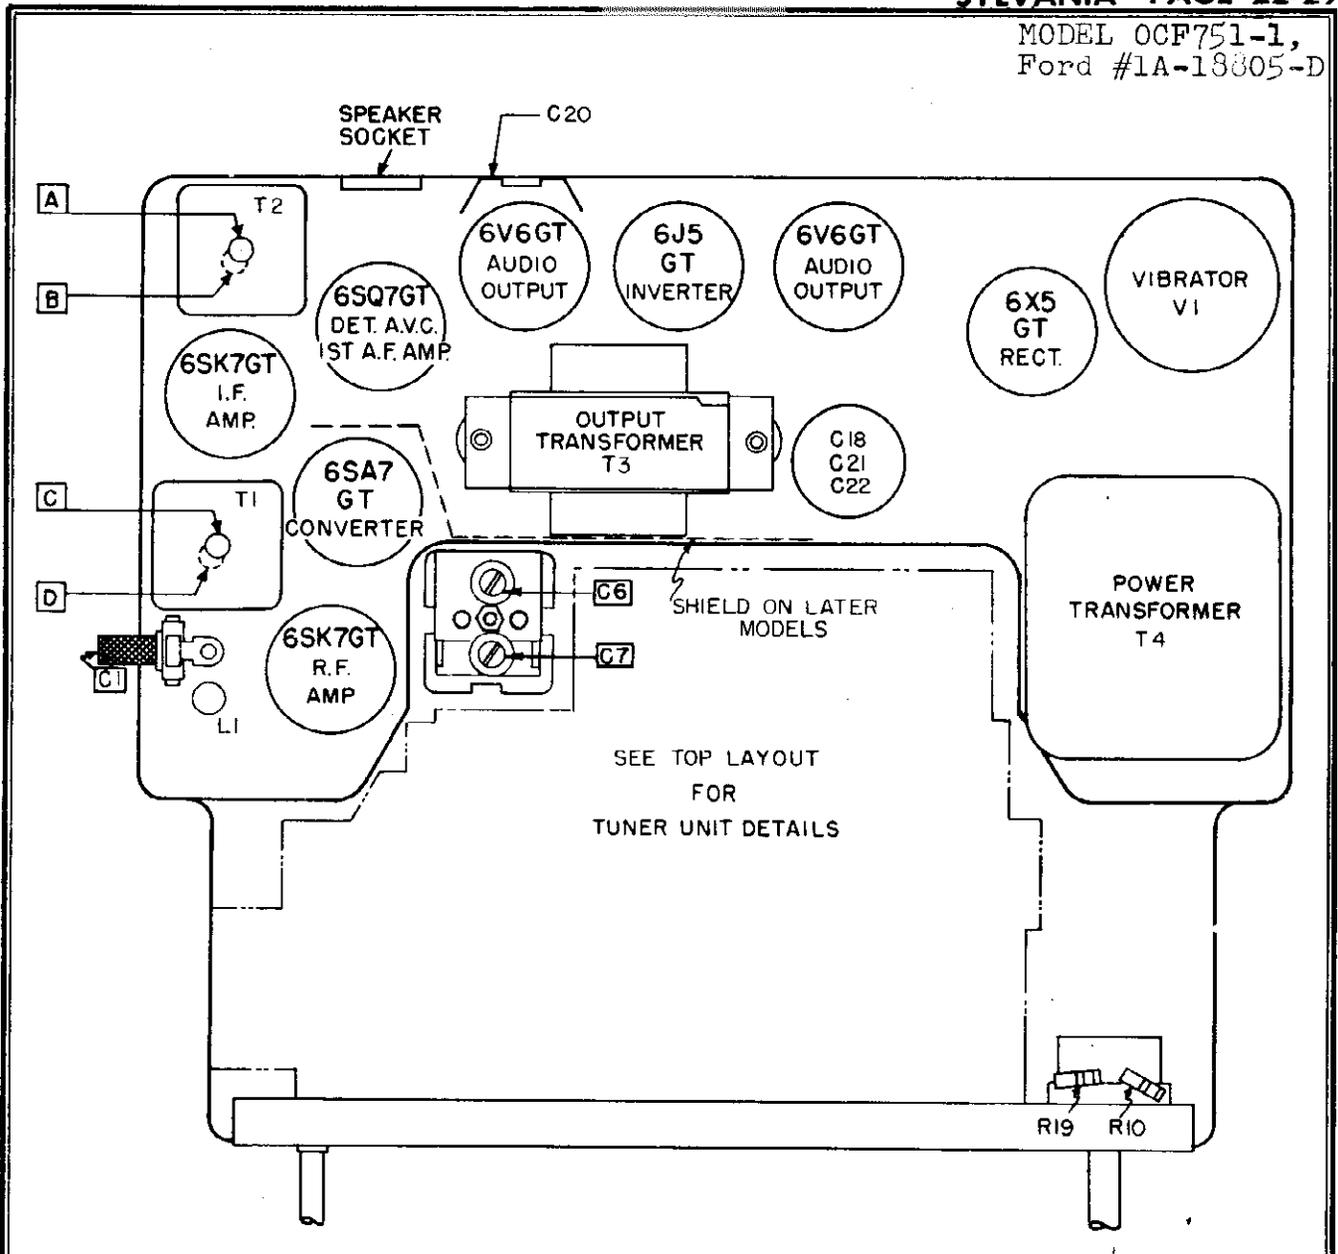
PARTS LAYOUT - BOTTOM OF CHASSIS
